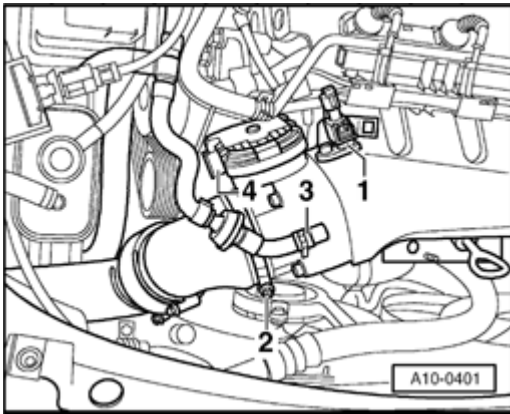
Identifying Hose Clip, Intake Air Temperature (IAT) Sensor -G42 & Throttle Valve Control Module -J338-
